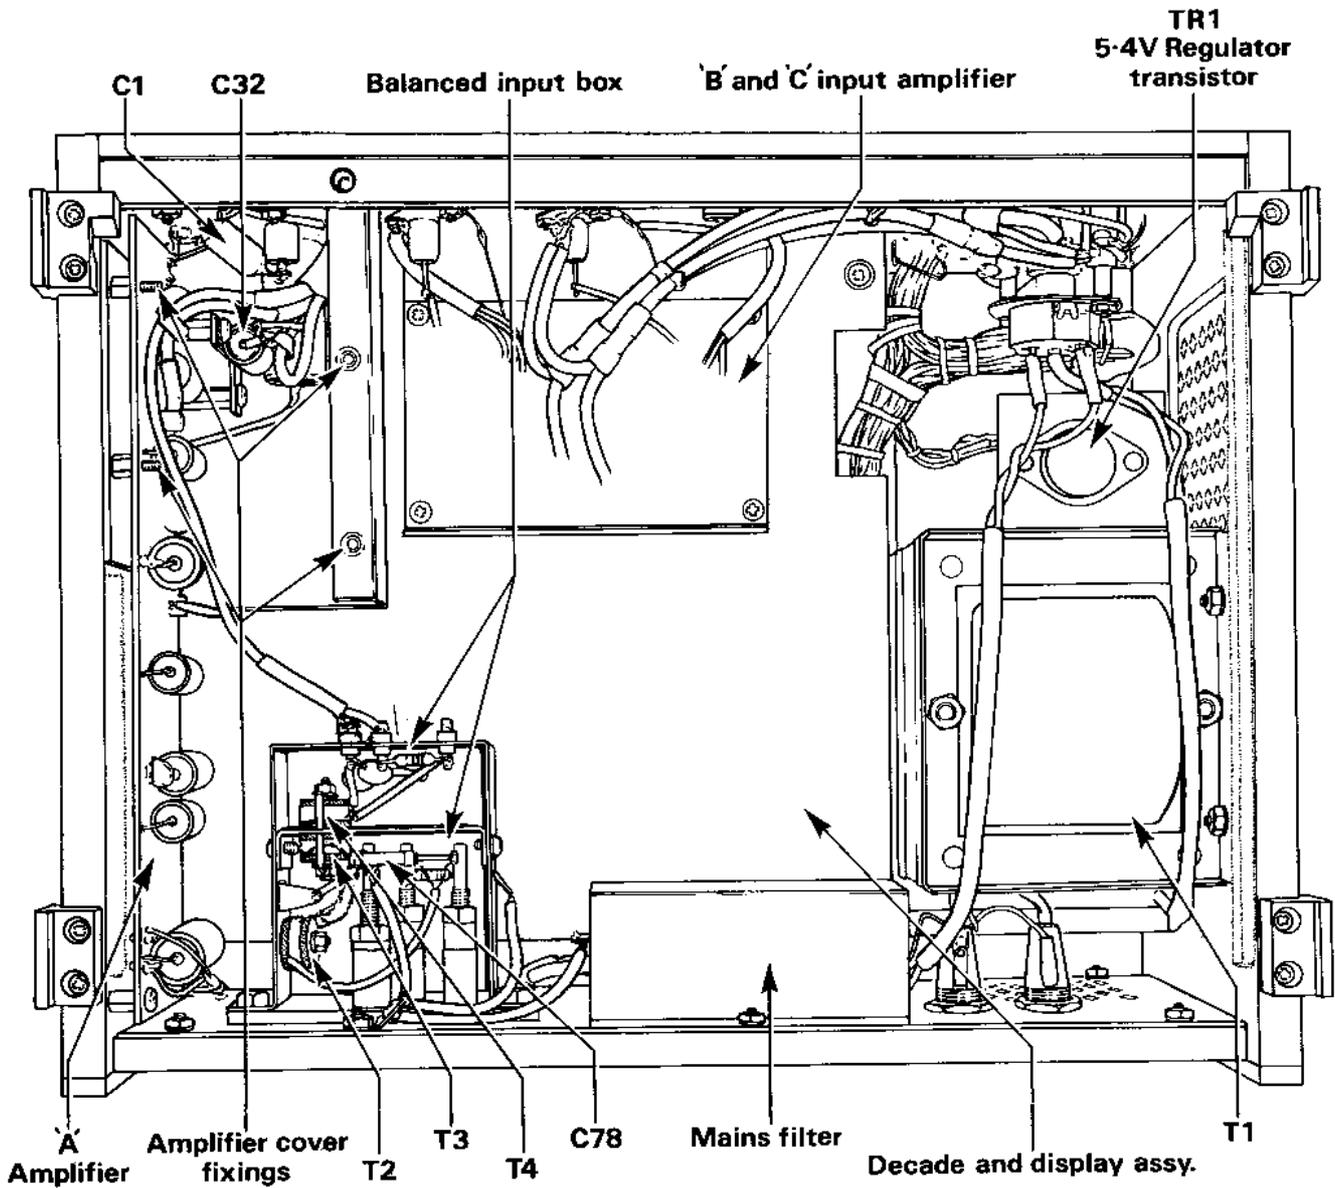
COMPONENT LAYOUT (UNDERSIDE VIEW)
